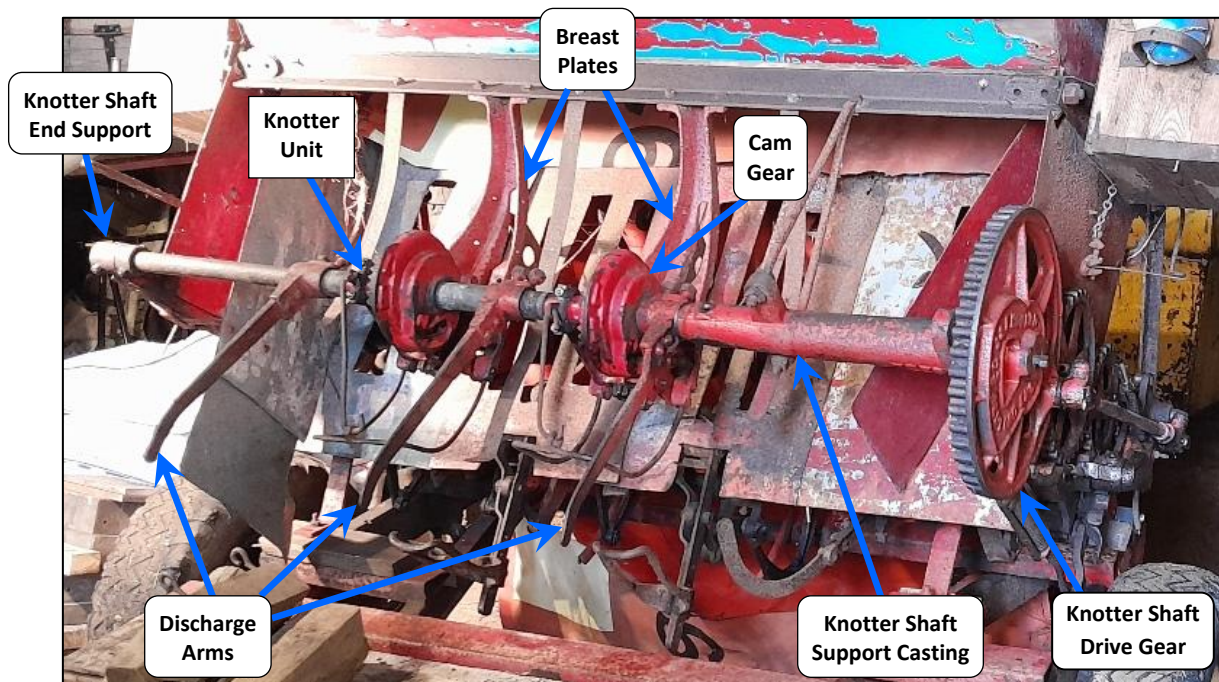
(Modified) Howard trusser knotter shaft components, shown in the 'at-rest' position
